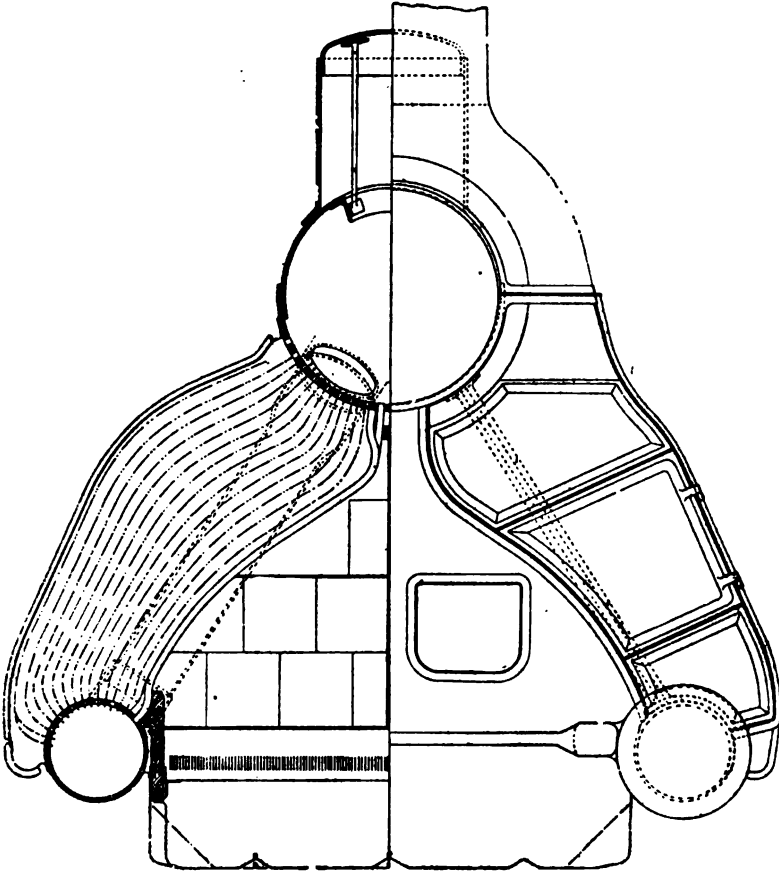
Normand Boiler (Express Type, Coal-Burning).
